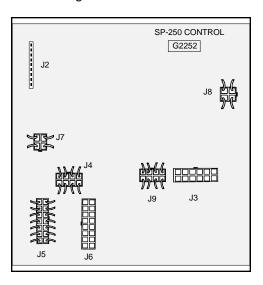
A - Control Board Molex Plug Locations for G2252 PC Control Board.
